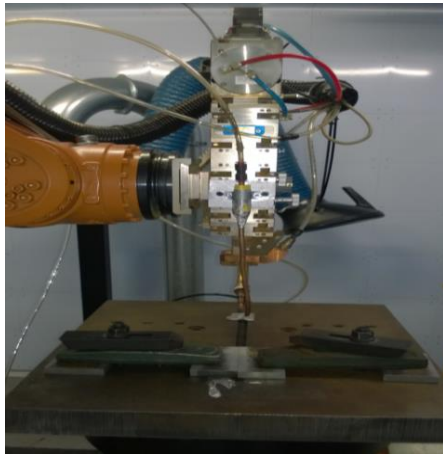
Experimental setup for keyhole fiber laser welding
